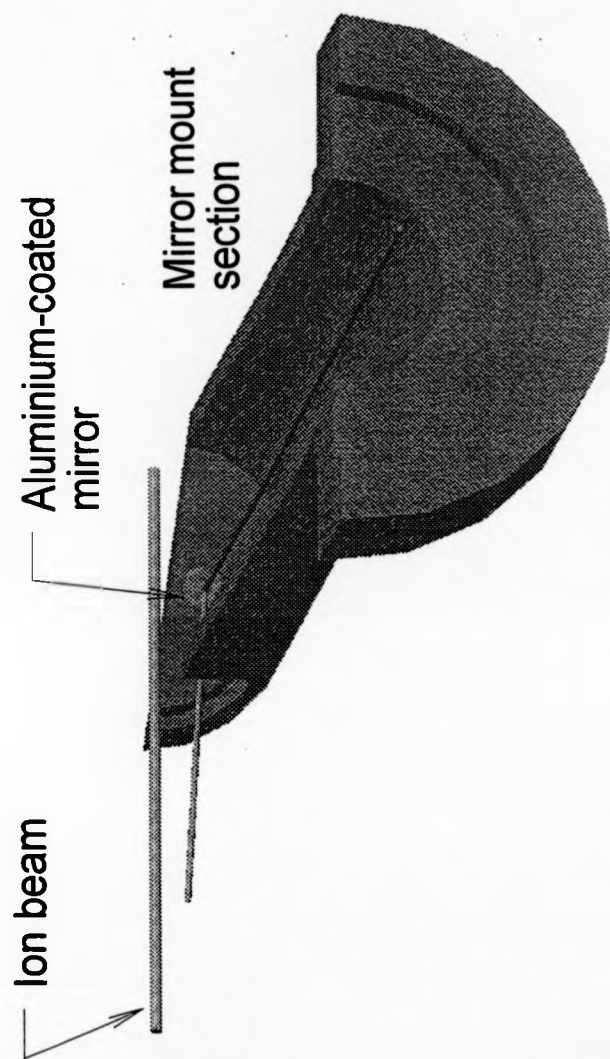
Three-dimensional schematic drawing of the in-vacuum mirror mount/tube.
